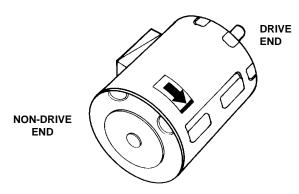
DRIVE MOTOR ROTATION
